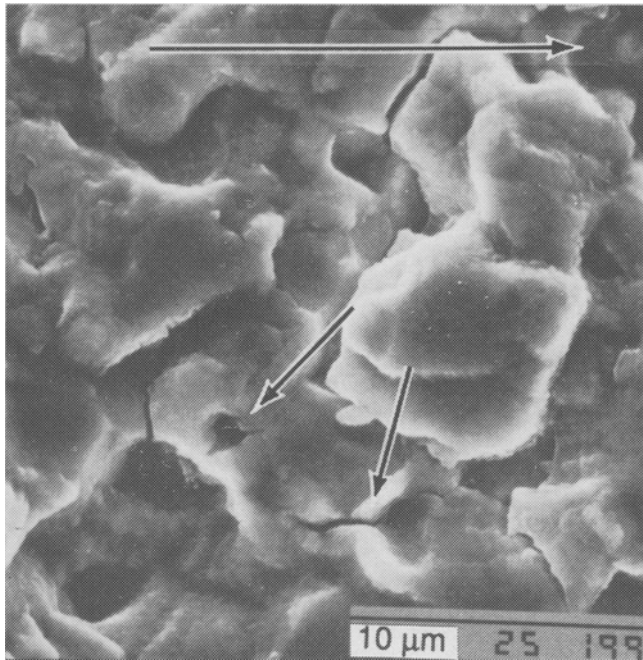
Cracks observed at carbides. Fractograph is from a FCP test in Condition B.
